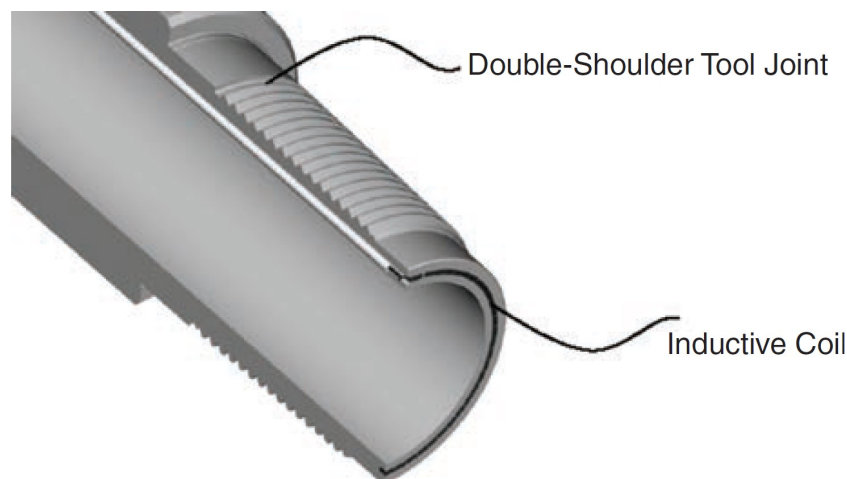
Schematic of Double-Shouldered Pin Tool Joint showing the location of Inductive Coil
